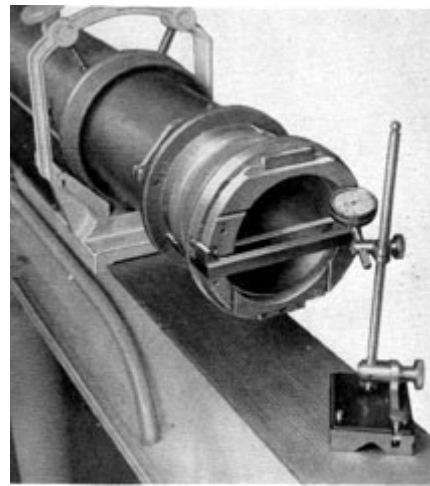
Dial indicator attached to surface gage on 90 degrees straight-edge at the right side for range position.
